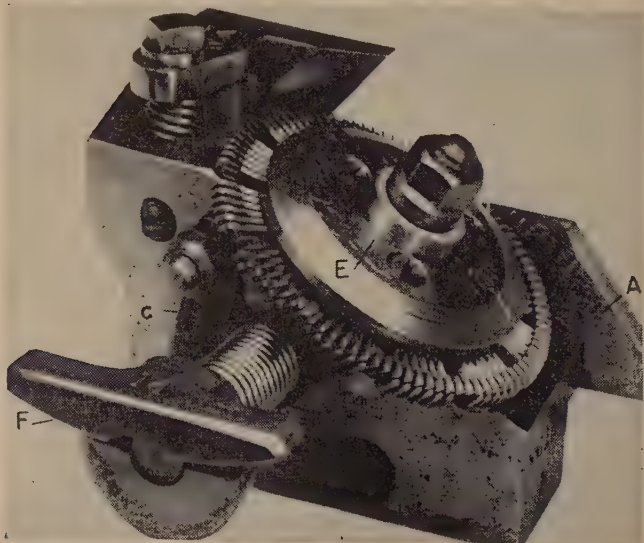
Outside view of cam ring section from Brinton S. S. W. machine.
